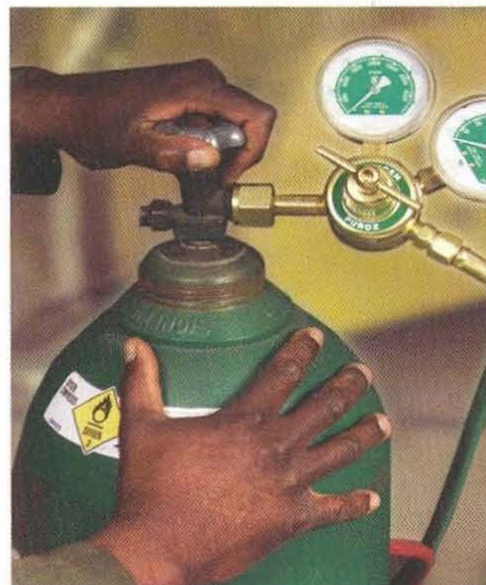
Stand to one side of the regulator when opening a cylinder valve.
